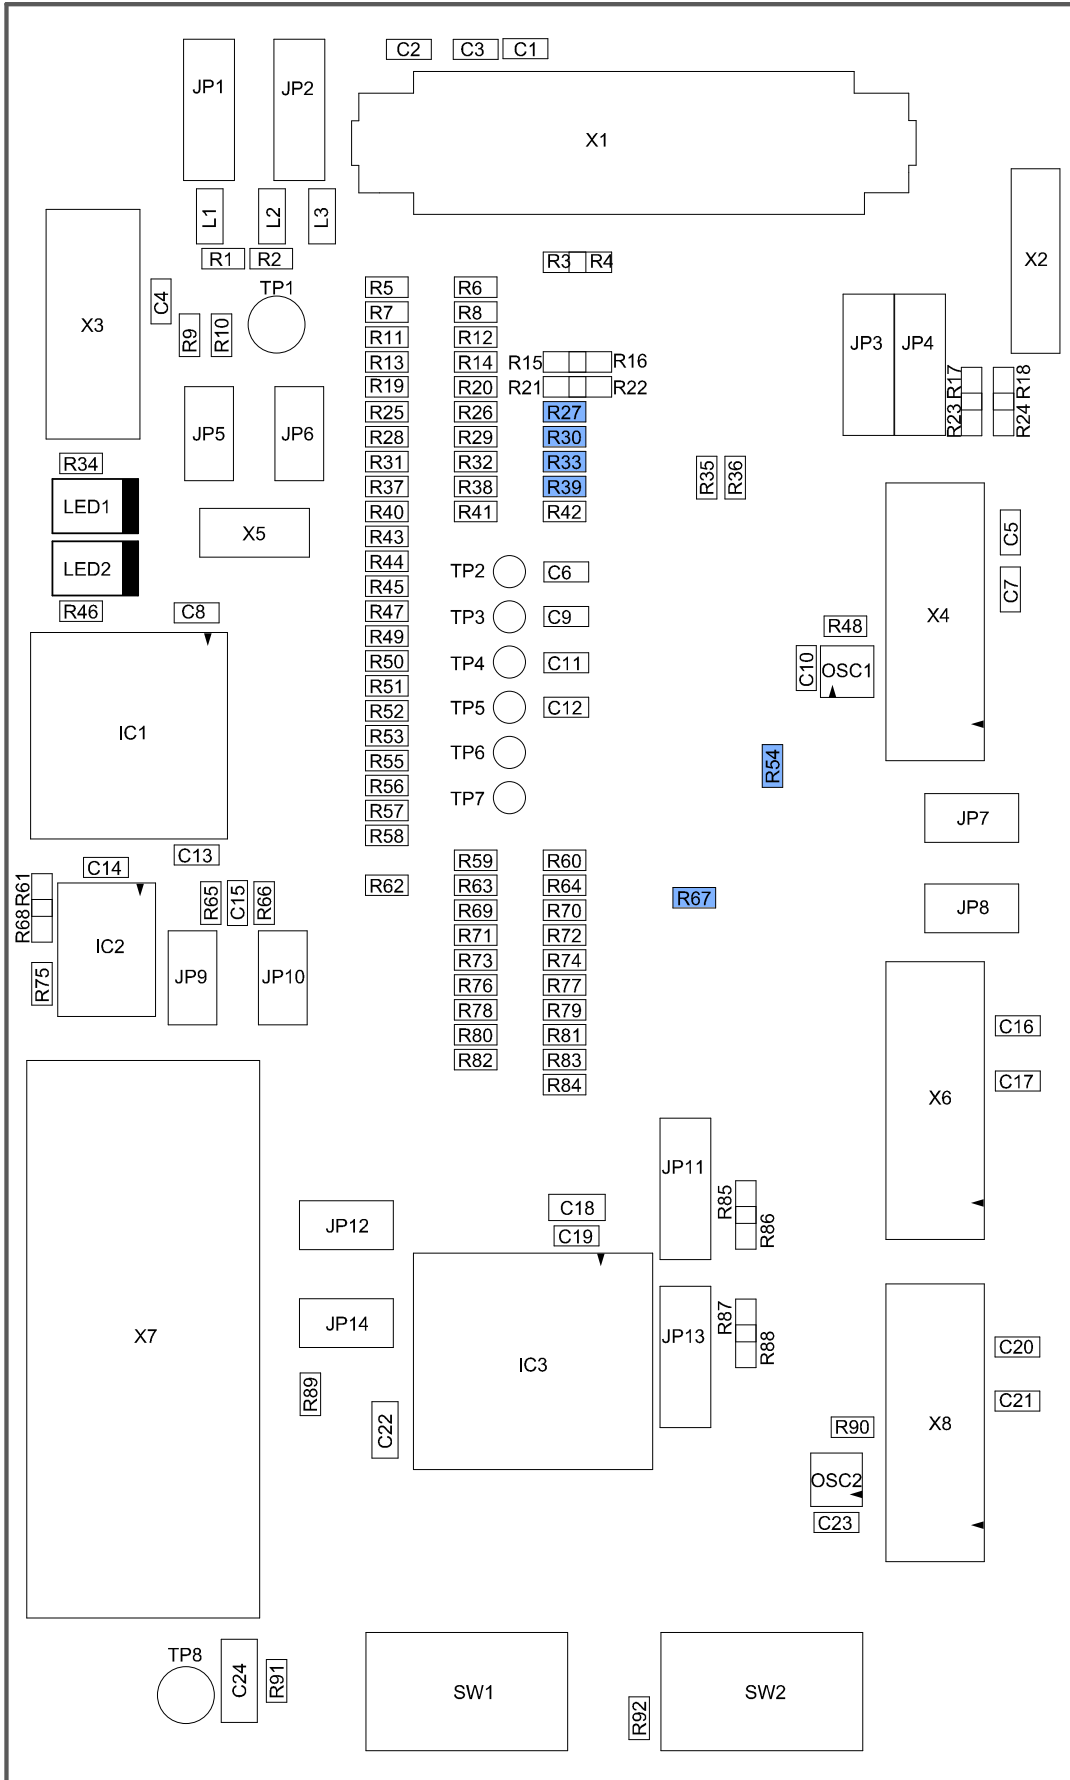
Apalis iMX8 Mezzanine connector X6 assembly options.
